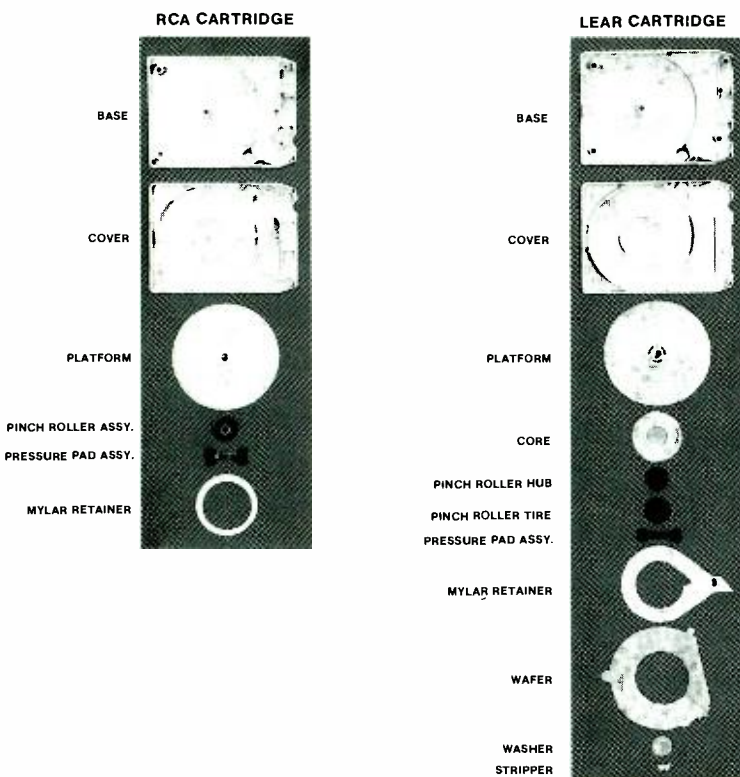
RCA improved upon the eleven-component Lear cartridge, redesigning it into a simpler and cheaper six-component unit.
